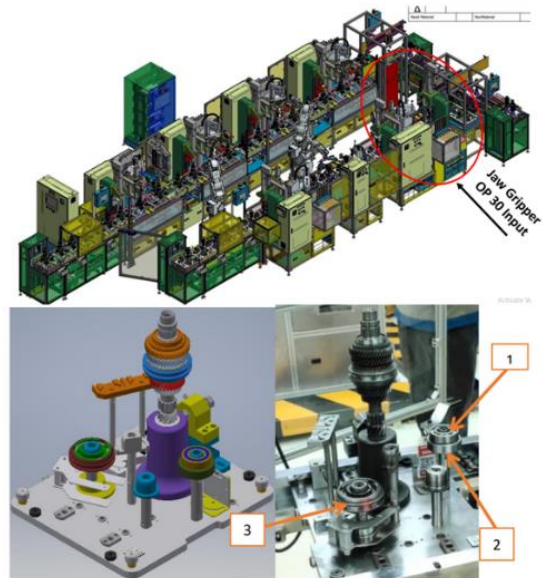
The OP 30 input station on the input and output gear shaft assembly automatic machine (Raynaldo *et al.*, 2020).
